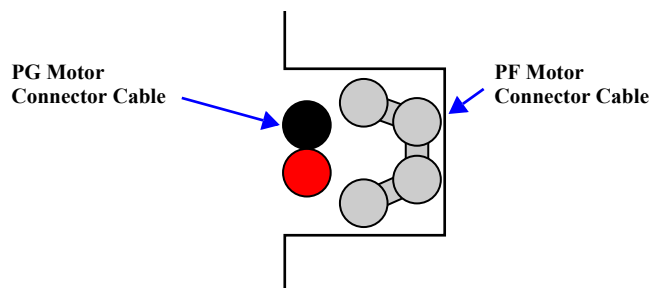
Setting the PF Motor and PG Motor Connector Cables (Section View of the Groove)
